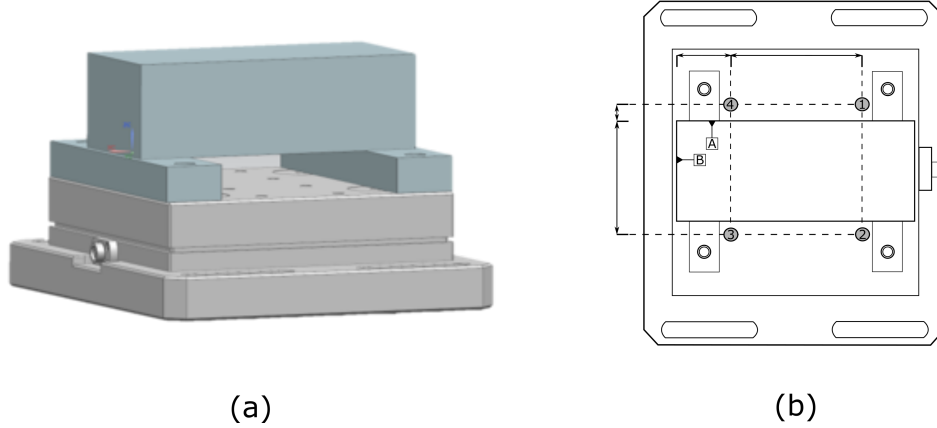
(a) Assembled fixture system with the workpiece bolted rigidly to two machined blocks (b) Fixture schematic including the position of x and y datum faces relative to the four dynamometer piezos
